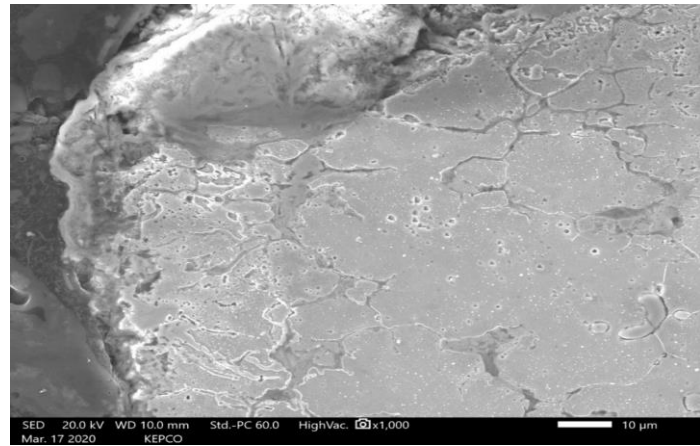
Scanning electron image of cross section of the fracture surface near outer surface which reveals multiple intergranular cracks
